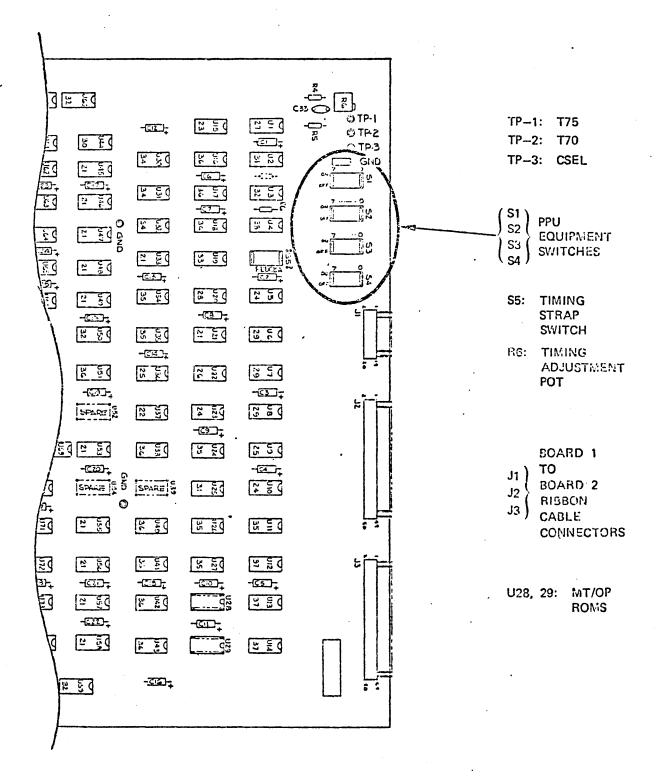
B-12. Synchronizer Card Assembly Drawing - DY159-A (Board 1)
